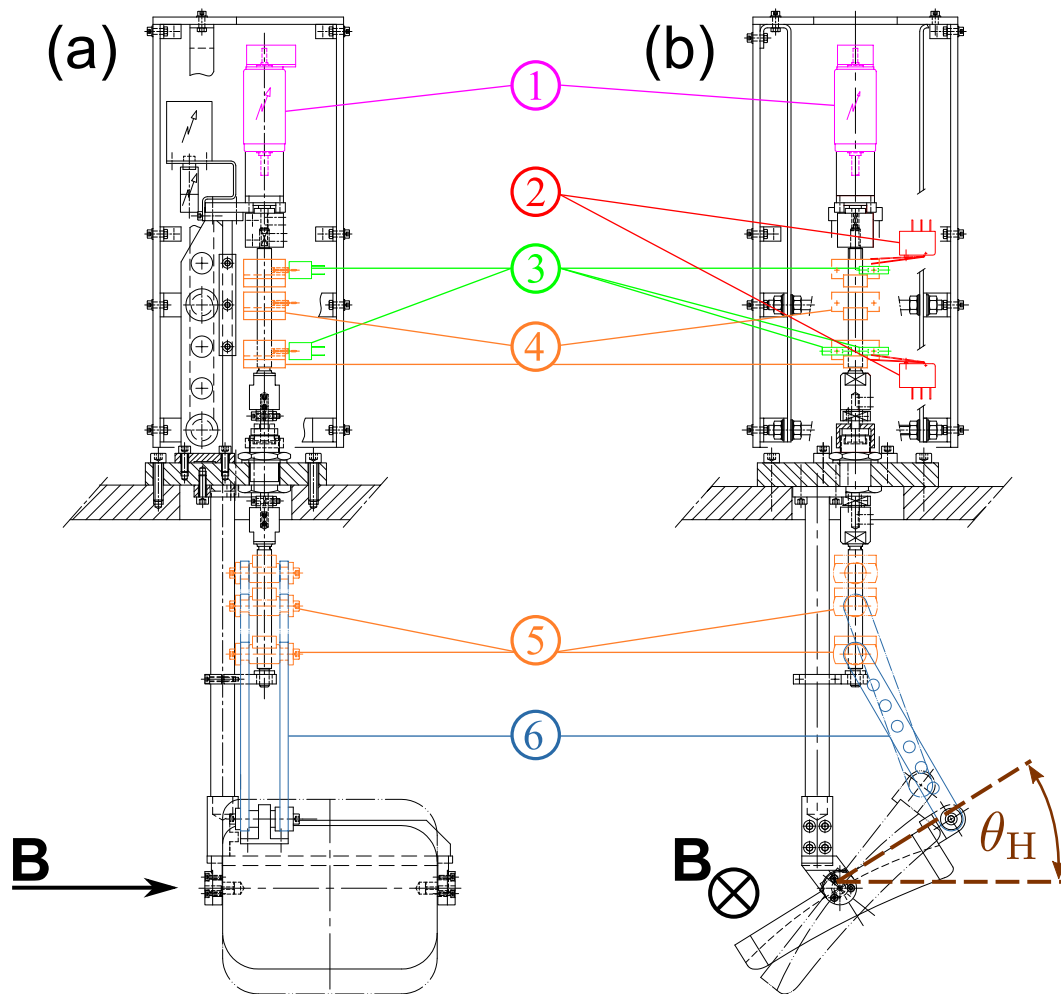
Schematic drawing of the mirror manipulator system. The control part and barriers (optical and mechanical) are above the flange (diagonal pattern), the movements are translated to the in-vessel part of the system, causing the mirror rotation w.r.t. the magnetic field direction.
